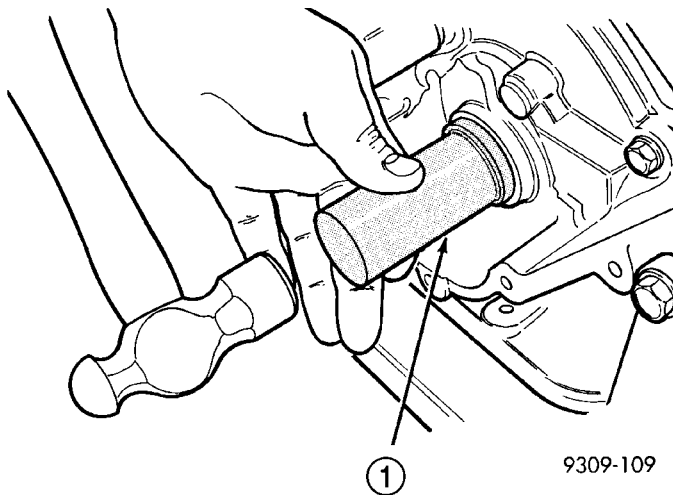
REMOVING CRANKSHAFT OIL SEAL WITH SPECIAL TOOL
